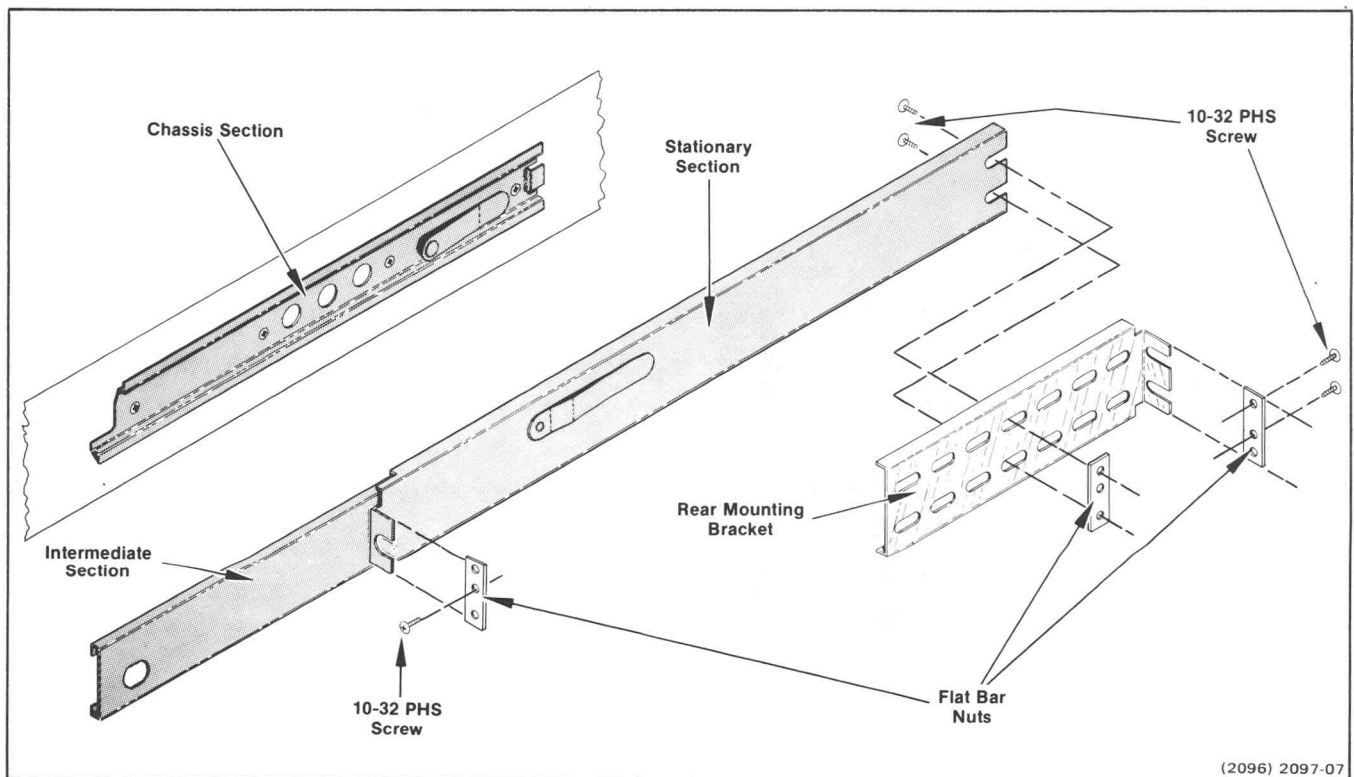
Exploded view of rackmounting hardware showing the relative position of parts.
